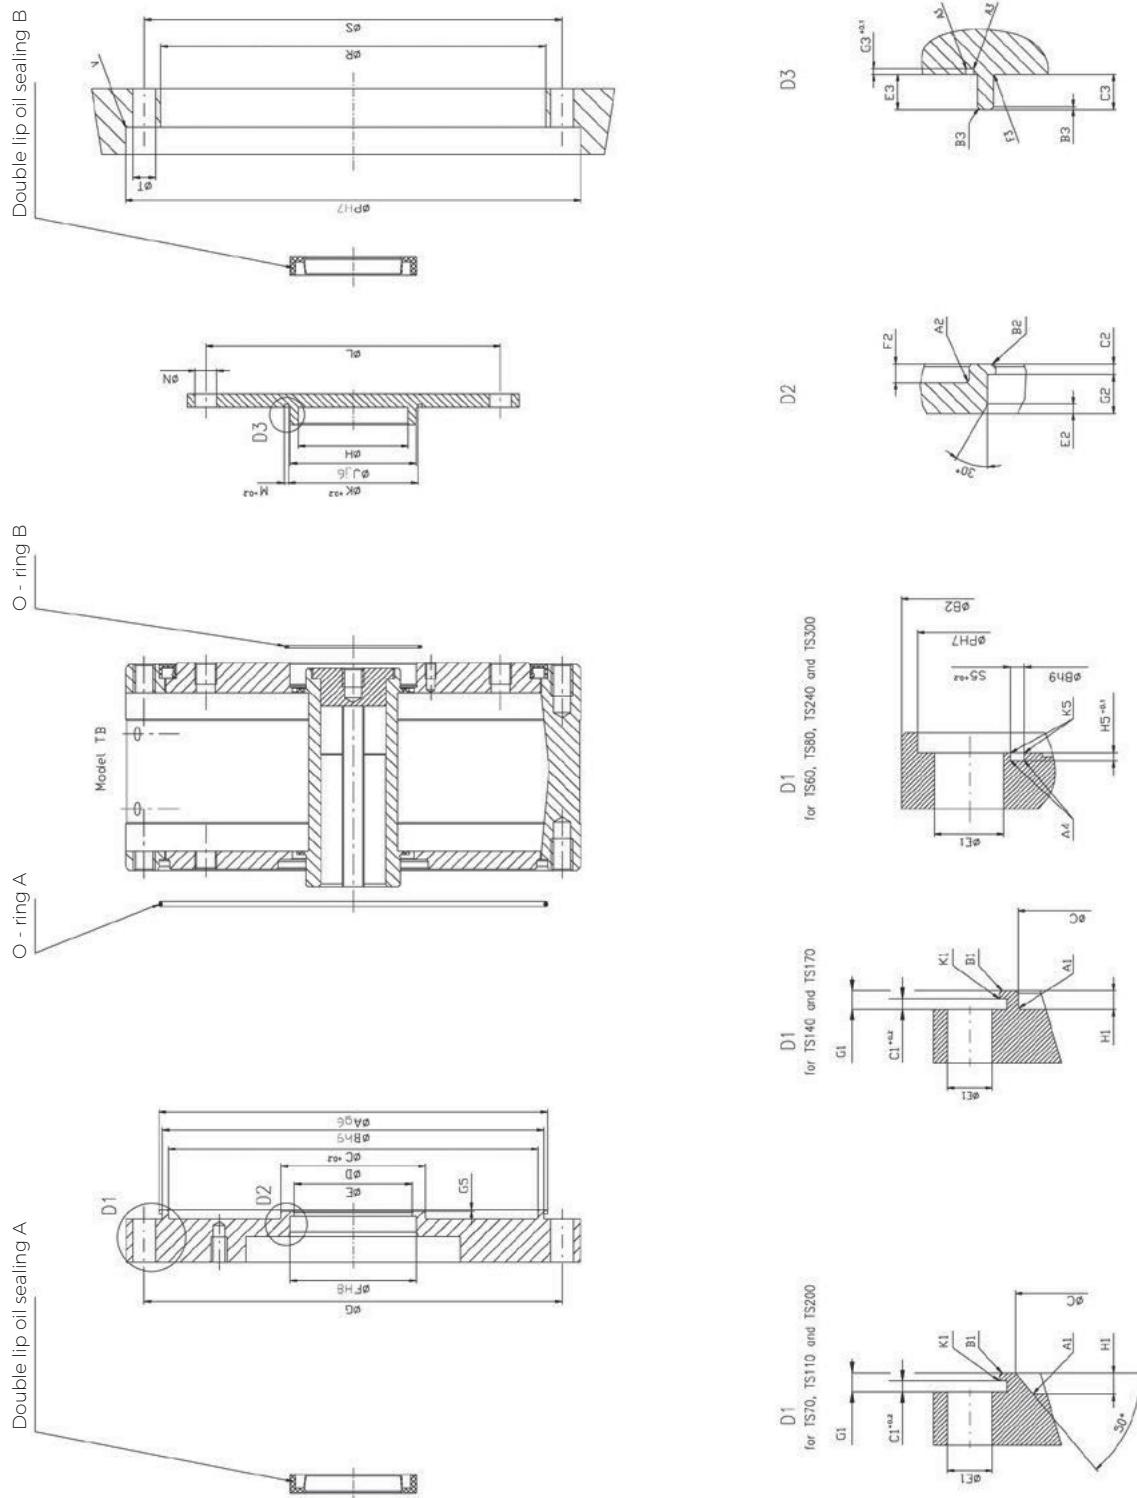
Dimensions of input and output flanges of the TwinSpin® T series reduction gear
